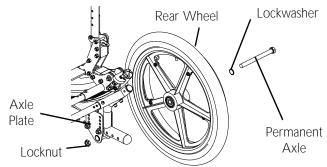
Installing/Removing Rear Wheels - Permanent Axle
